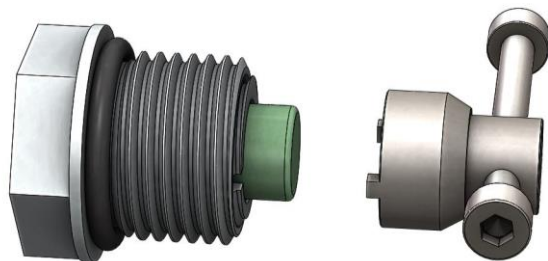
The airbag squib is mounted into the holder using a special tool.
